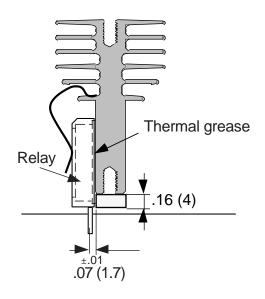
Mounting with L19101 clip; dimensions in inches (mm)
